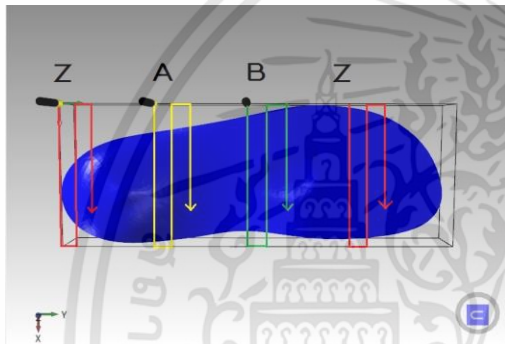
The working area of the insole model file for the 3-milling head toolpath in 4 section
